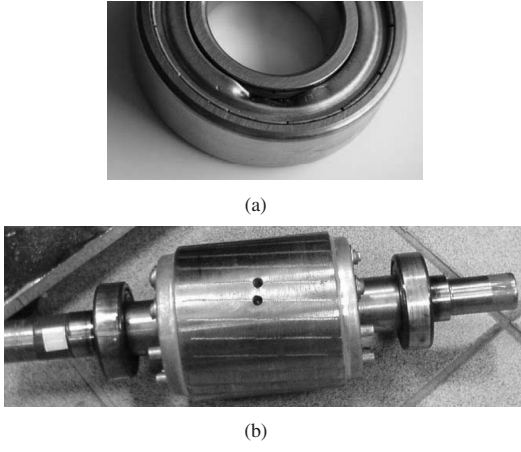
Fault motors: (a) Denting the seal of the bearing to simulate bearing fault; (b) Two holes are drilled on the rotor bar to simulate broken rotor bar.
